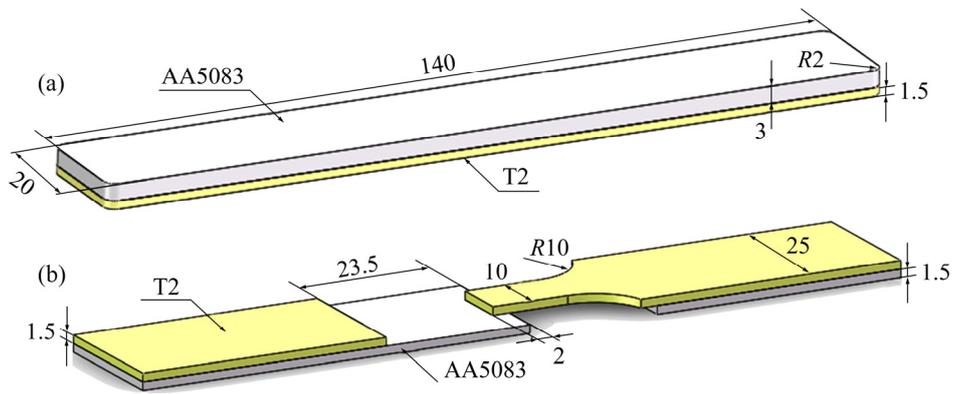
Dimensions of bending (a) and shear (b) specimens (mm)
